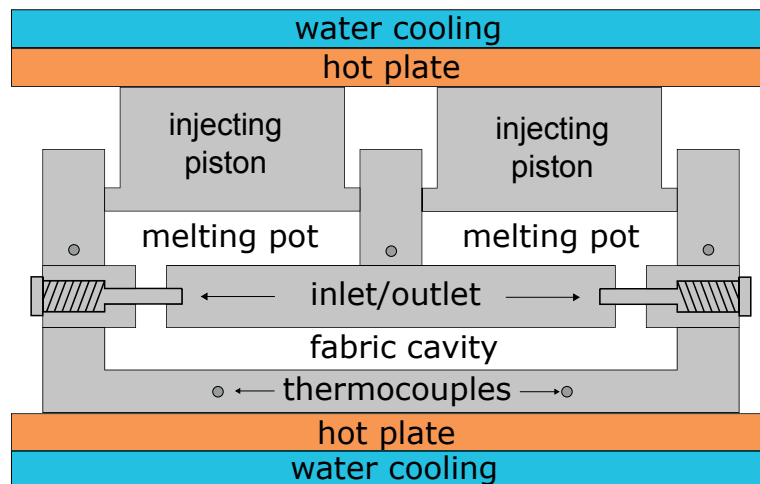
Schematic representation of lateral cross-section view of the TP-RTM tool.
